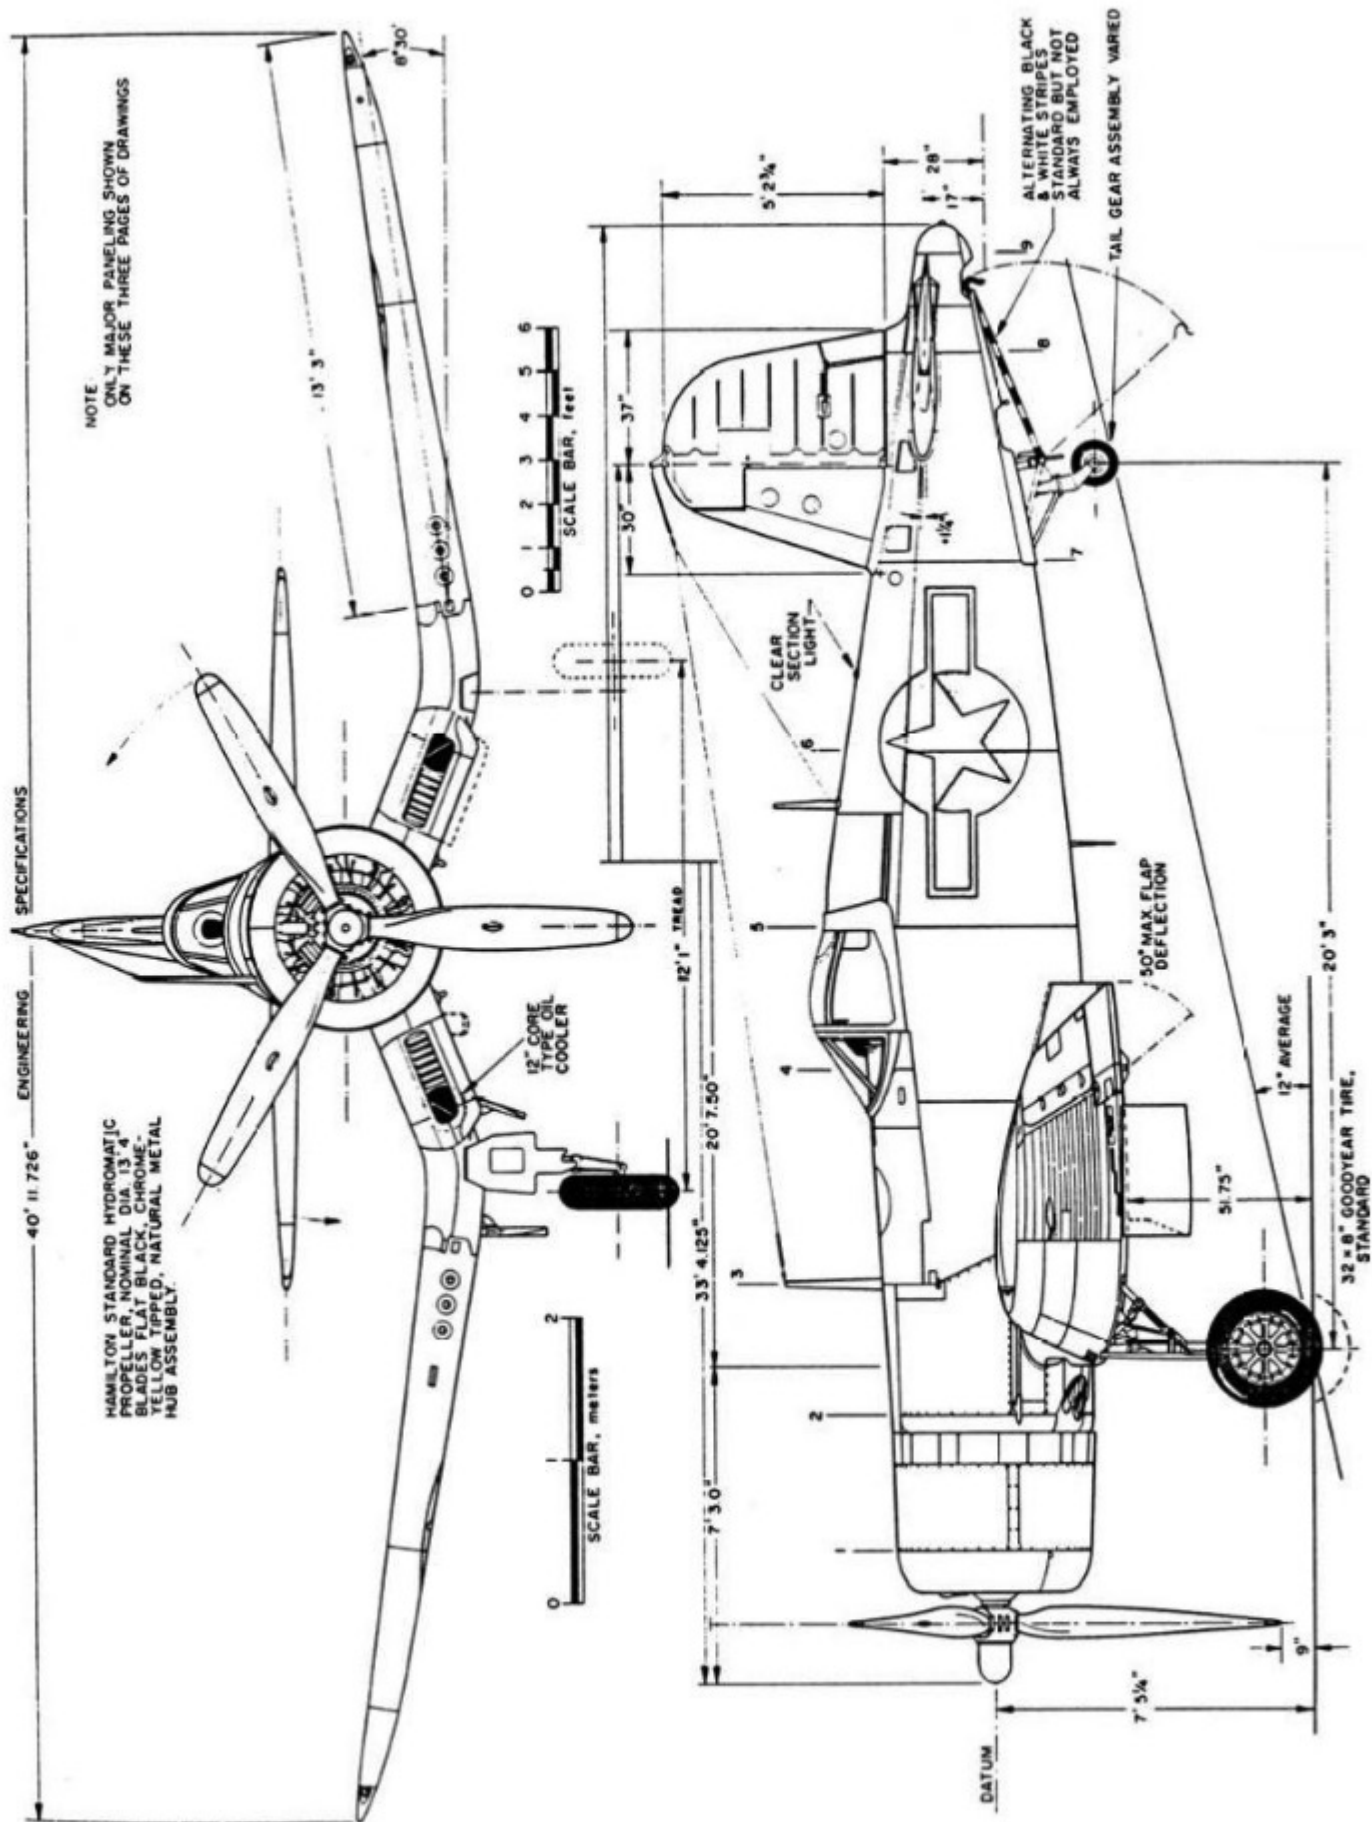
Vought F4U-1D Corsair. Drawing by Paul Matt.
